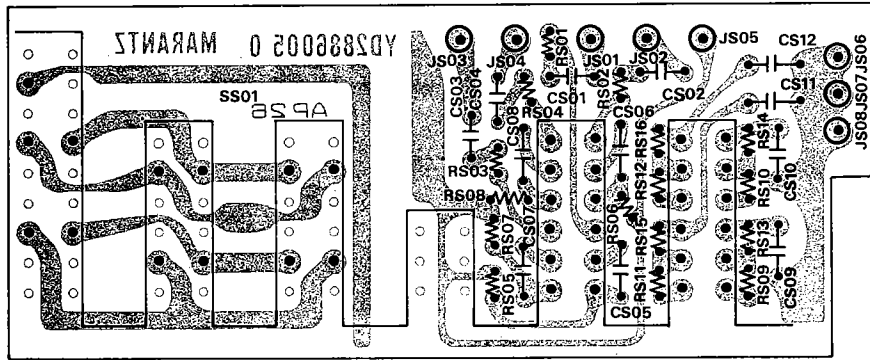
Loudness, Hi Filter, Speaker and Power Switch Unit Assembly, PS01 Component Locations
